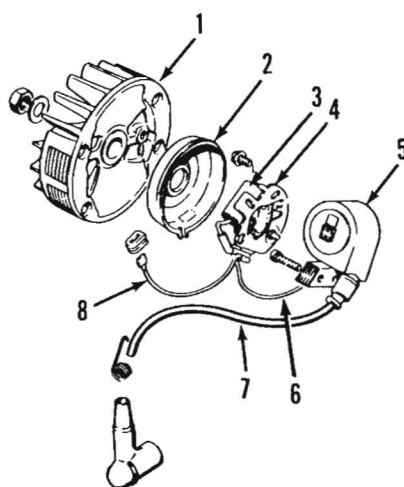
Exploded view of magneto ignition system used on Models 015, 015AV and 015L.
